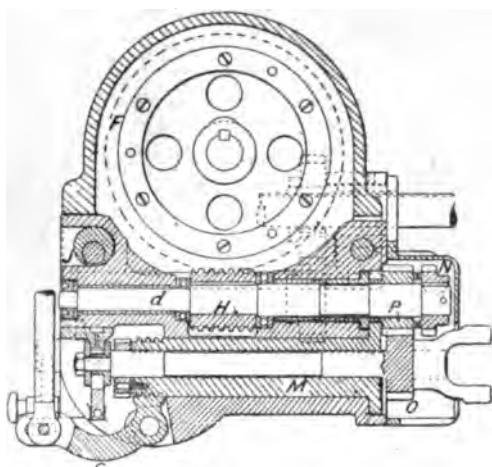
Vertical Section through Worm Gear, &c., driven by Telescopic Feed Shaft, No. 5 Miller.
